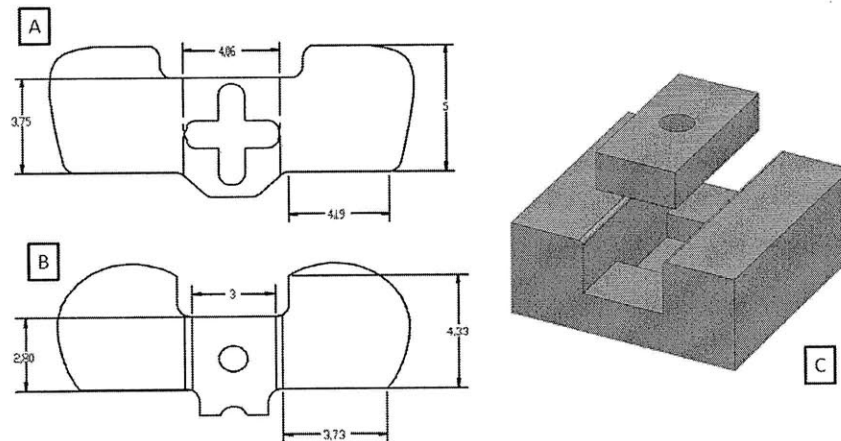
Squishbot1 final locking plate design. (A) & (B) Drawings of the locking plates in their flat configuration. (C) CAD model of the jig used to bend the locking plates into their final configuration.
